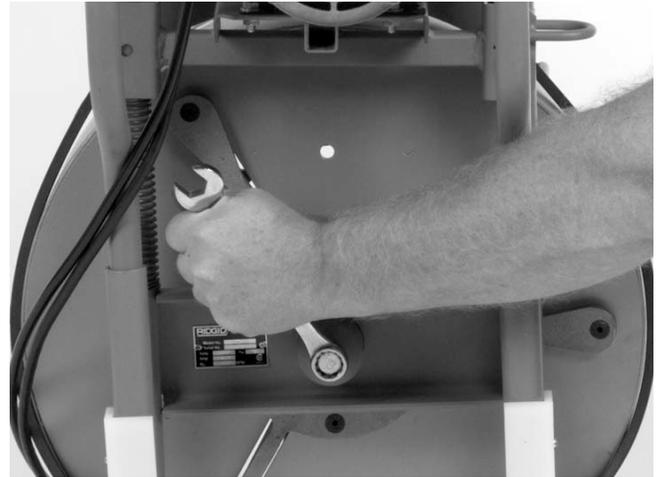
Remove Bolt Which Fastens Drum Assembly to Machine Frame
